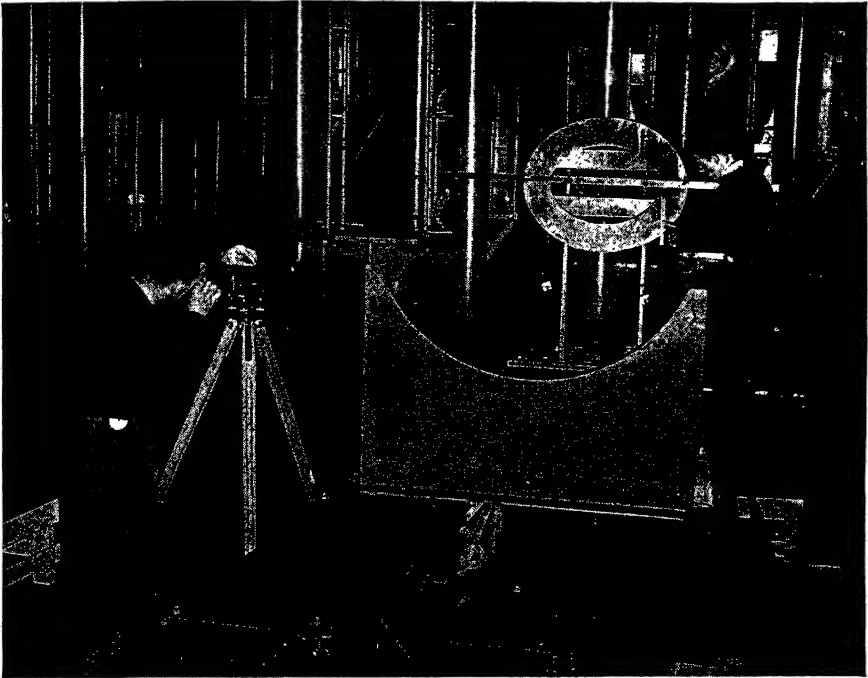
Leveling a fixture. A Y level manufactured by the Eugene Dietzgen Co. of Chicago being used to level an airplane fixture at the Hagerstown, Md., plant of the Fairchild Engine & Aircraft Corp. (*Eugene Dietzgen Co. and Fairchild Engine & Airplane Corp.*)
